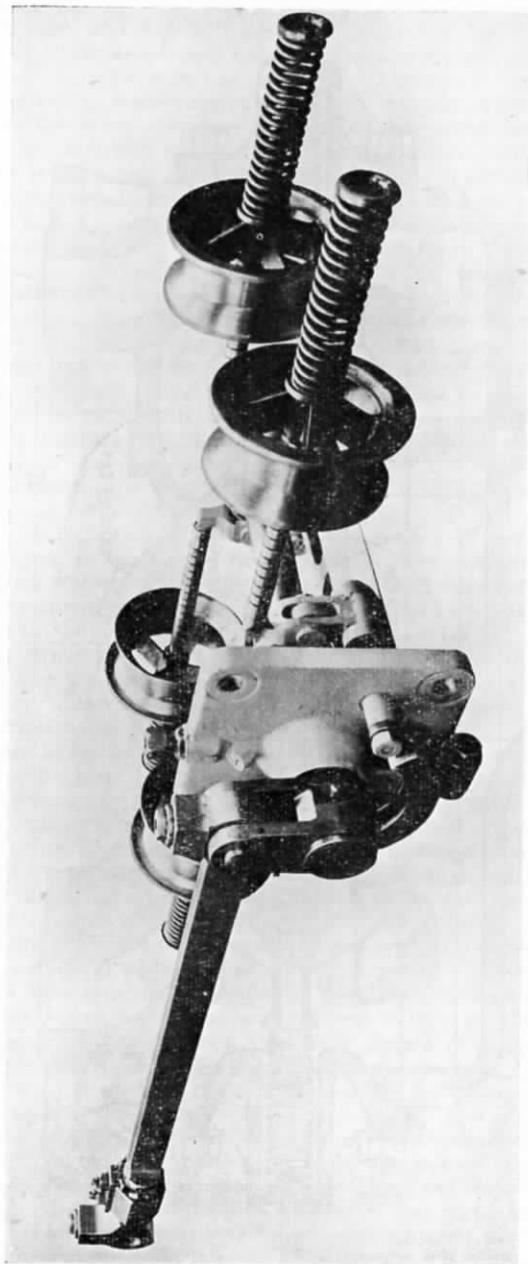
ARRANGEMENT OF POPPET VALVES AND LEVERS; "O.C." TYPE GEAR.
